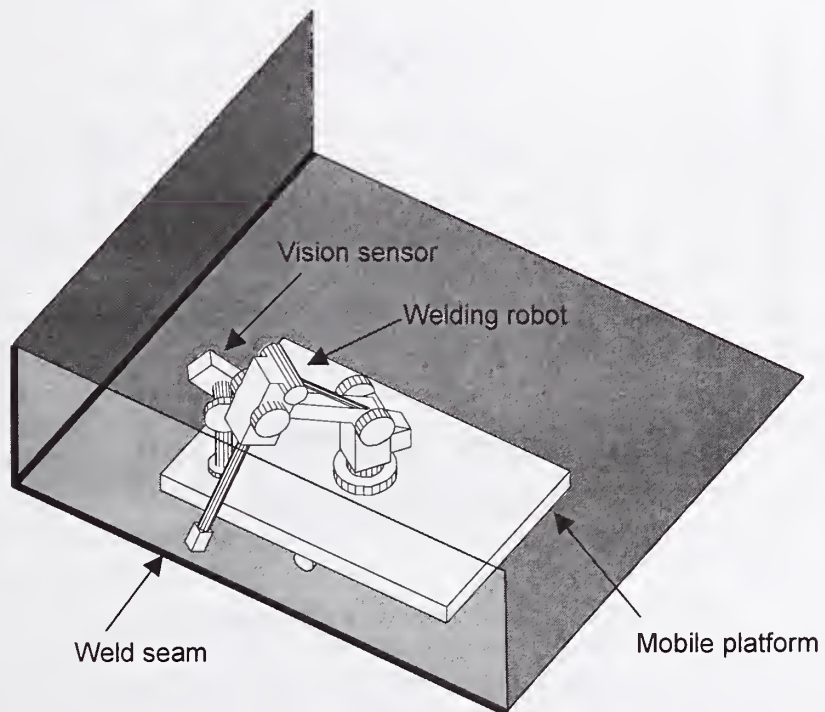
Mobile platform-manipulator welding system using vision sensor
